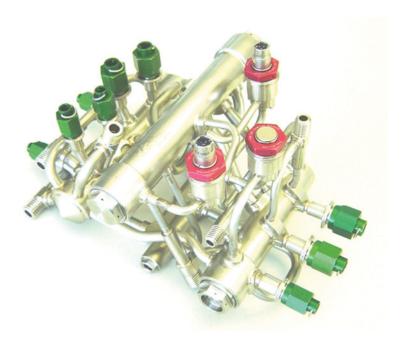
Large Scale Integrated SCHWOB (LSI-SCHWOB)
